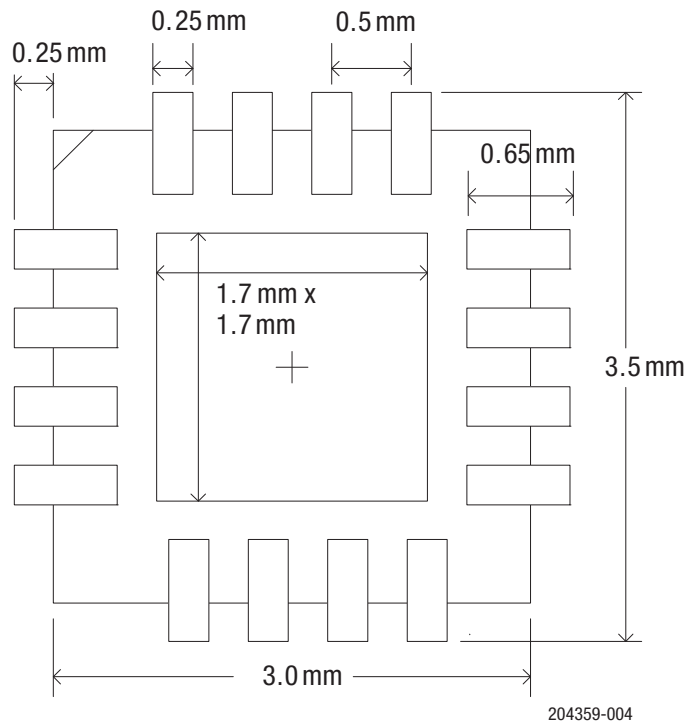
RFX2401C PCB Layout Footprint (Top View)
